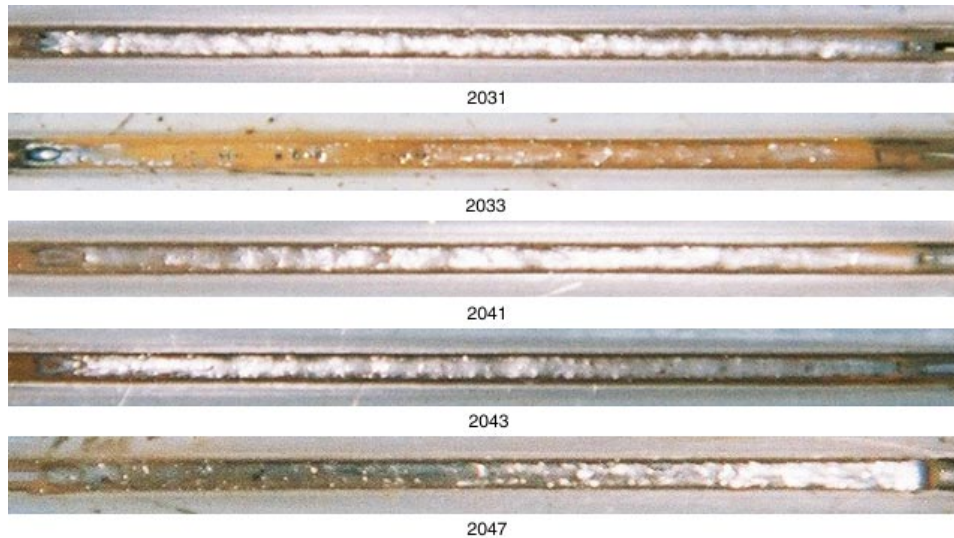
Pictures of some selected V-groove welds.
